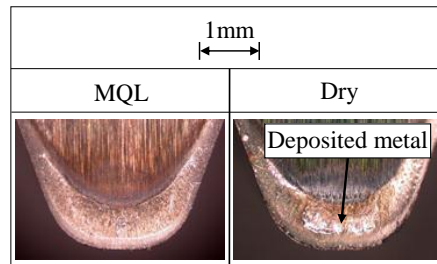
Comparison of the deposited metal between MQL and dry cutting (SCM435, HB195, T15, cutting speed: 86 m/min cutting length of groove: 0.5 m)
